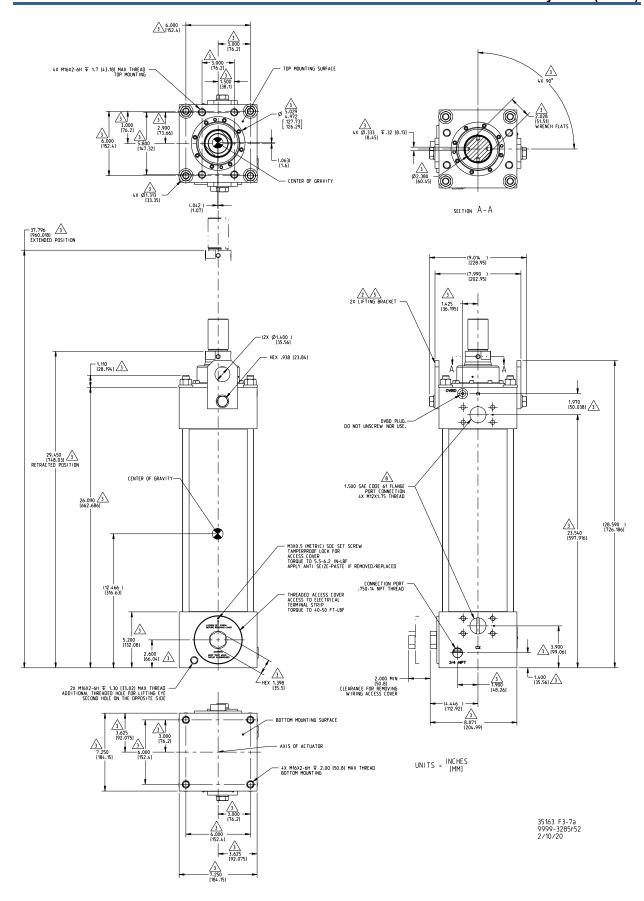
VSPC 6x8.346 Installation Dimensions
